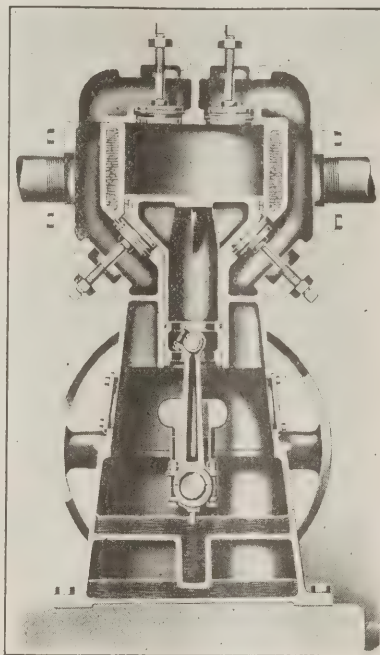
SECTIONAL VIEW OF NEW VACUUM PUMP
